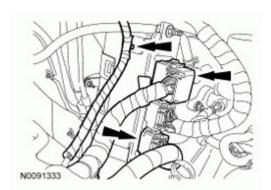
Locating Engine Wiring Harness Retainer And PCM Electrical Connectors Courtesy of FORD MOTOR CO.
